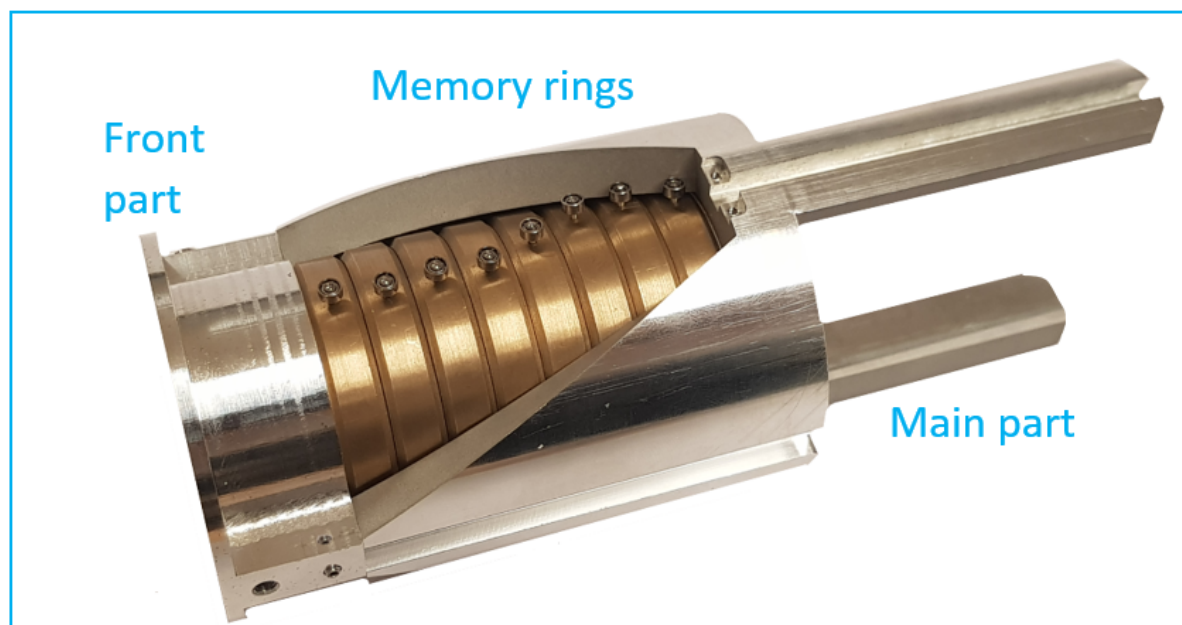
Picture of the translational motion mechanism from the machined prototype
